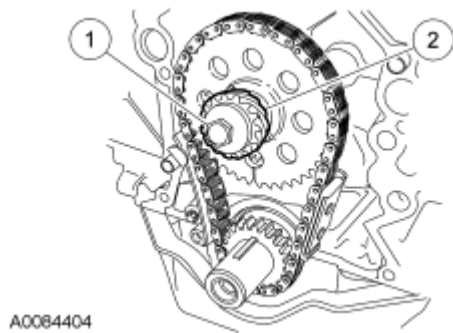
Identifying Bolt And Camshaft Synchronizer Drive Gear
